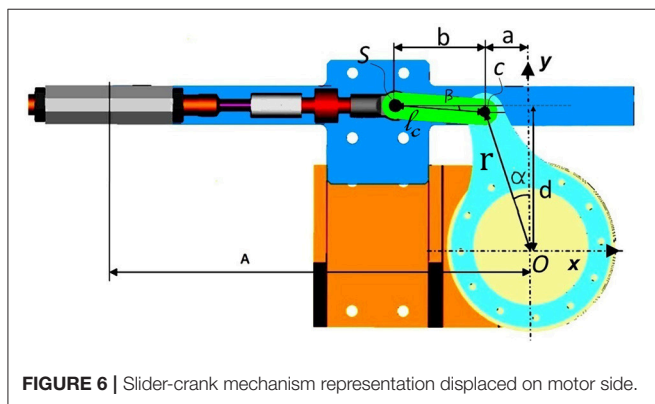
| Slider-crank mechanism representation displaced on motor side.
